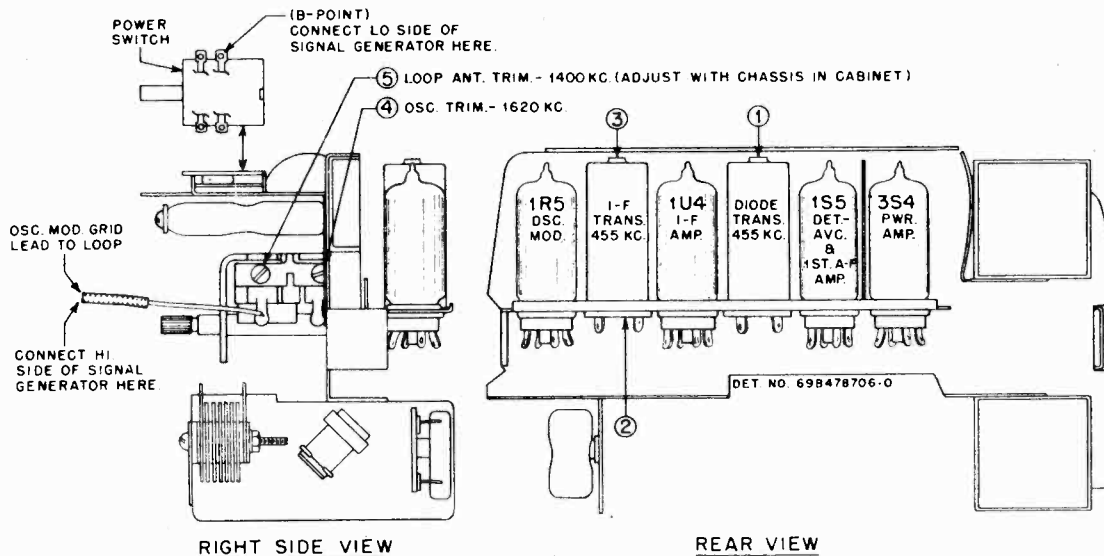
CHASSIS HS-62A TUBE & TRIMMER LOCATIONS
